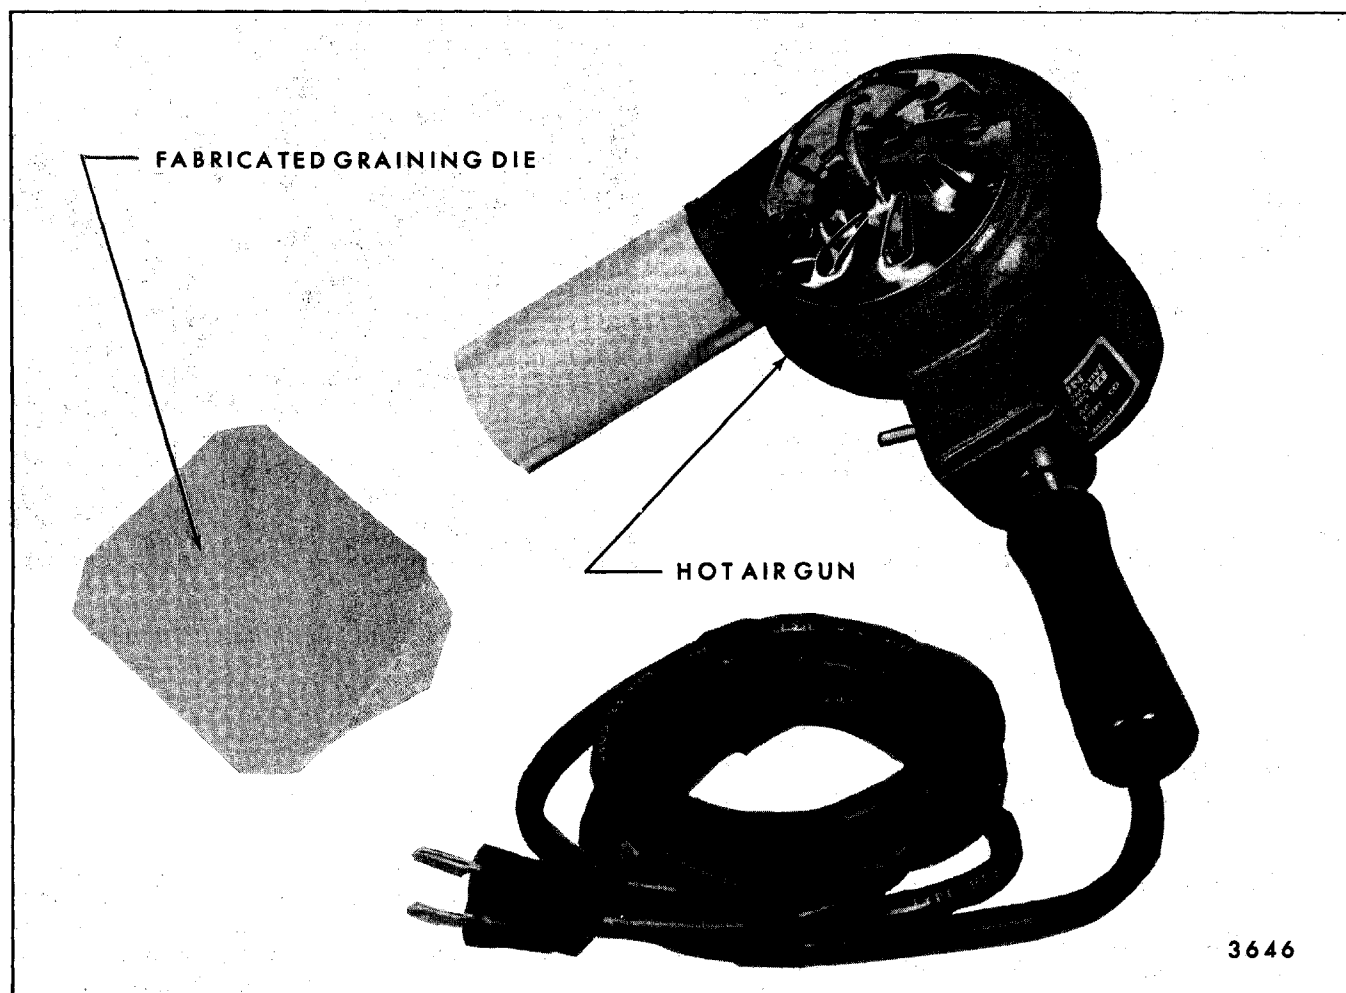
Fabric Roof Cover Repair Die and Hot Air Gun
